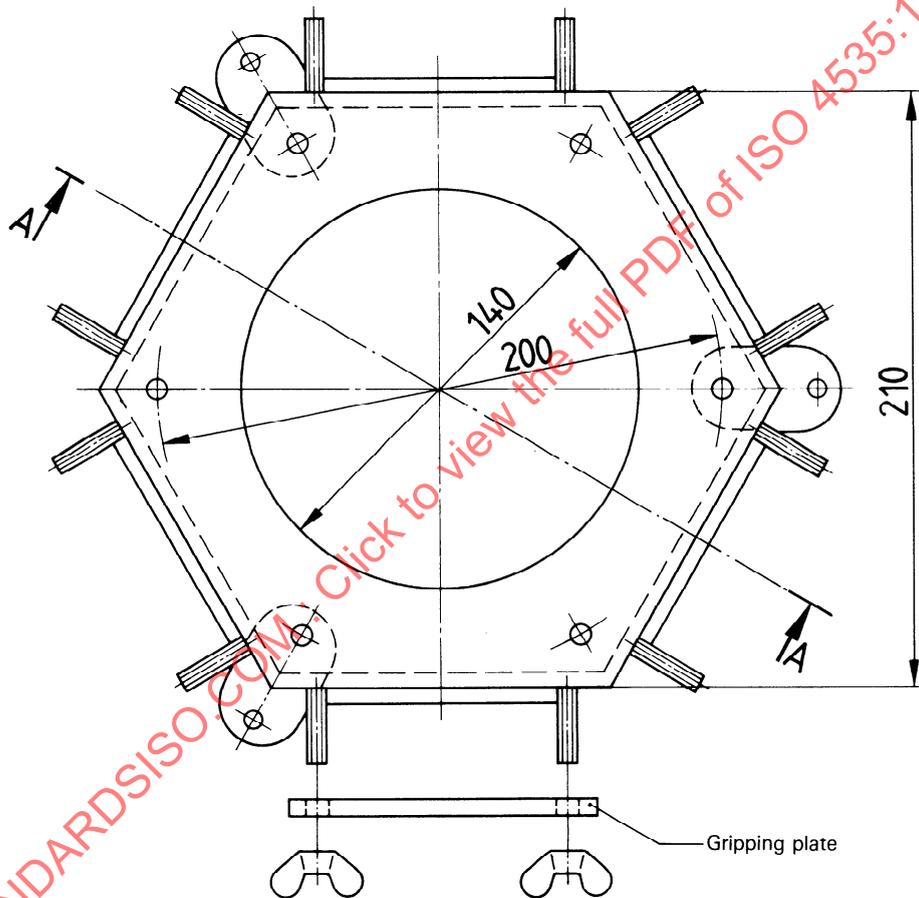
Top view of hexagonal vessel without lid and paddle stirrer
